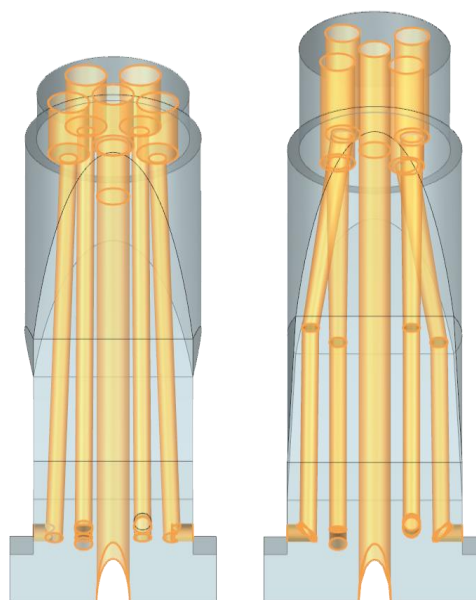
Size comparison of the probe heads from Amecke and Lawaczek [1] (top, shaft diameter 6 mm) and the new Miniaturized Wedge Probe (MWP) (bottom, shaft diameter 3 mm)
